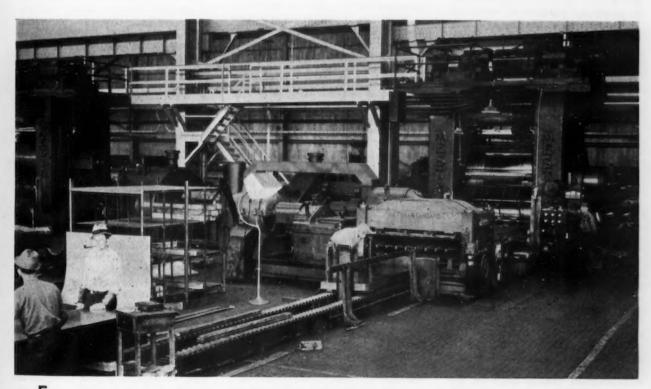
Discharge end of skin pass mill, with belt conveyor receiving sheets and delivering them to a roller leveler.
